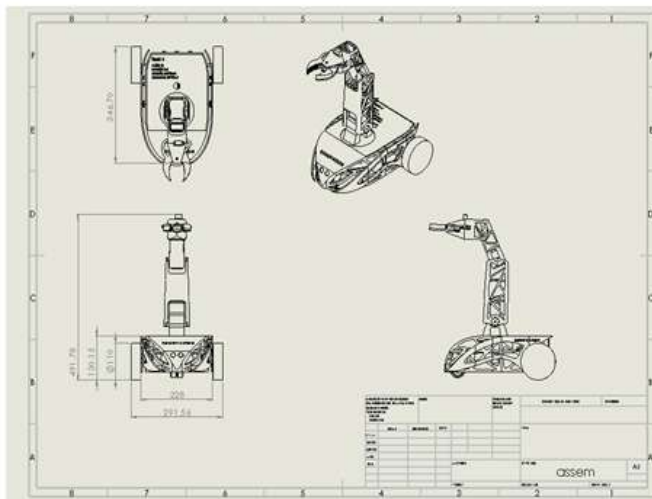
Dimensional Drawings of Front view, Left view and Top View
